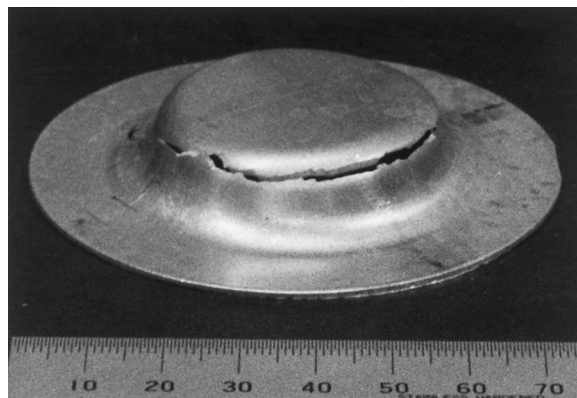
Fracture around punch corner in deep drawing test of the 2024 sheet with  $d_0$  of 80 mm.
